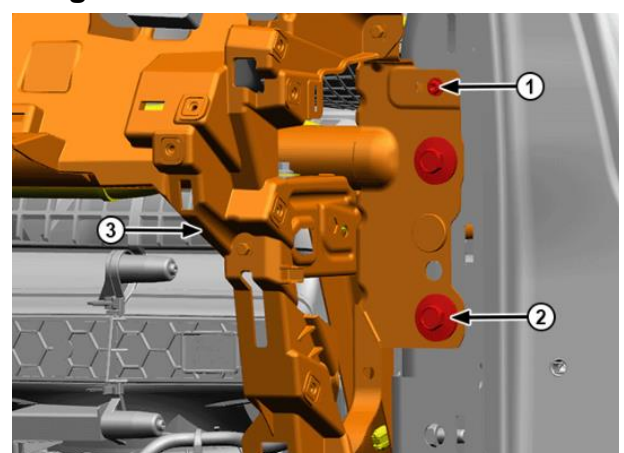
CCB to Cowl Side Bolts and Fastener (Right side shown, left side similar.)
